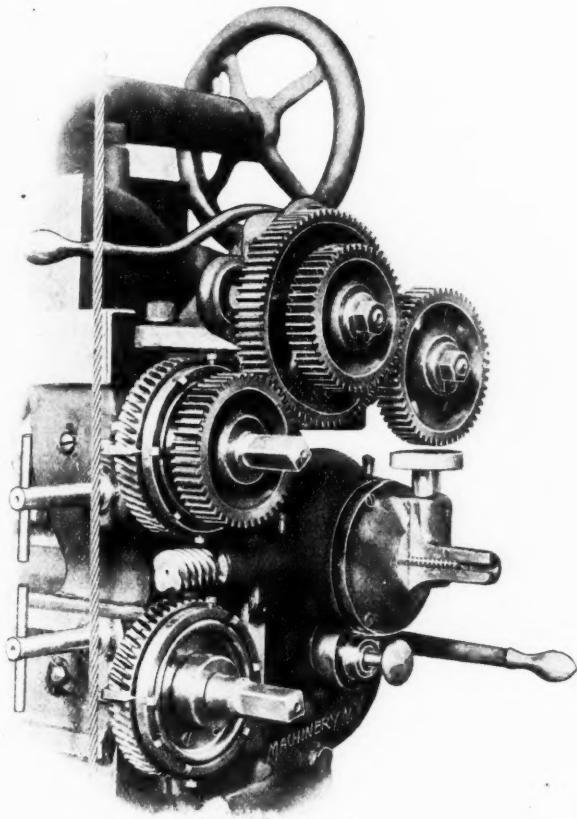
View of Feed Gearing Set up for Thread Cutting; Indicator Clips for Setting Tools and Stopping Cuts are also shown.
